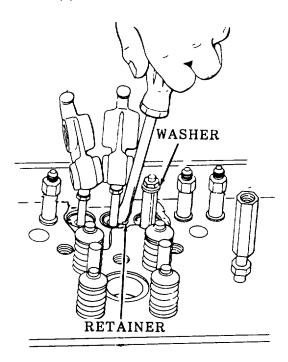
Removing Push Rod from Upper Side of Cylinder Head Using Tool J3092-01.
